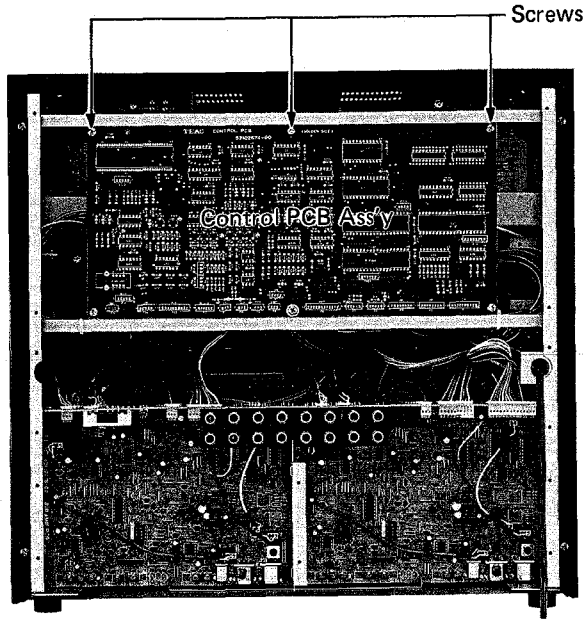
CONTROL PCB ASS'Y REMOVAL
